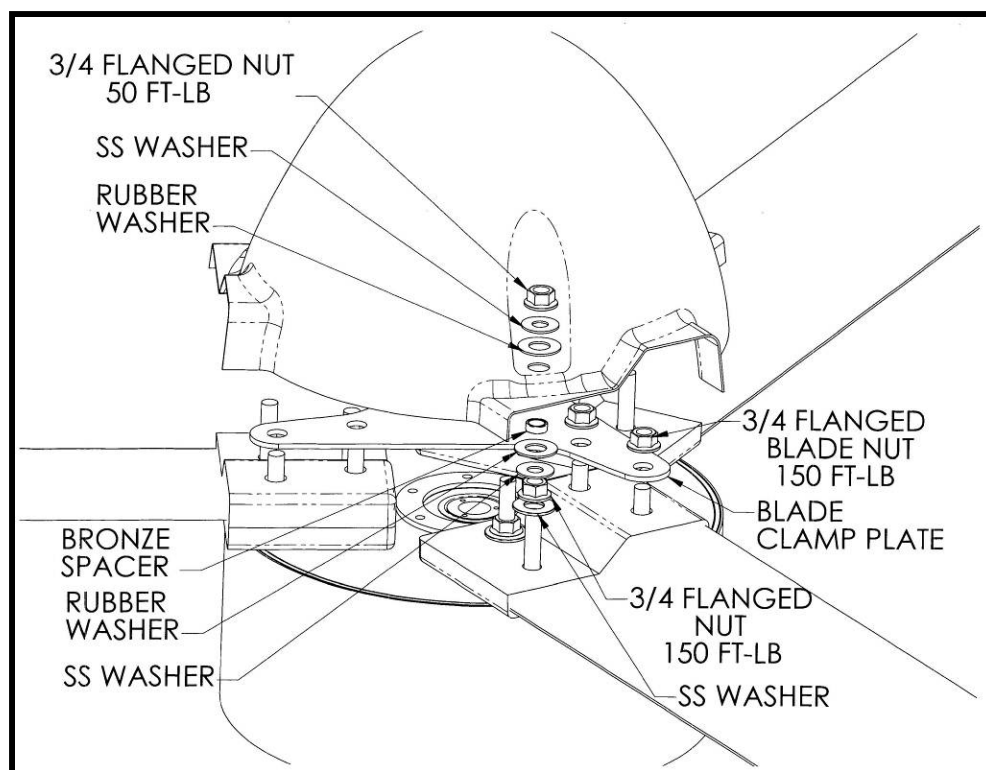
EXCEL Blade, Clamp Plate and Spinner Attachment
